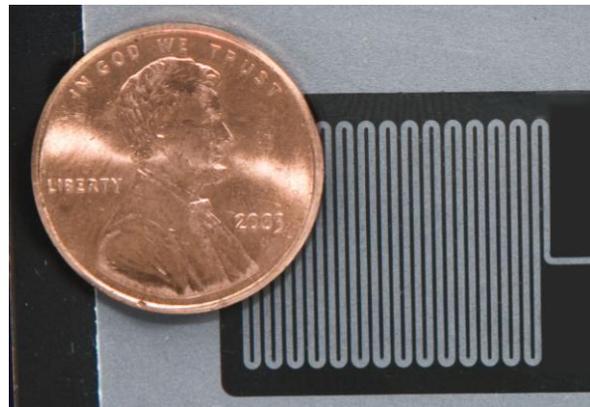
Laser welding is one of the cleanest joining methods available. Photo courtesy of Leister Corporation.
